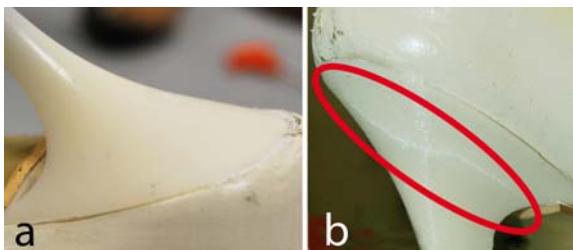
Assembly issues on TH heels: a) injection molded part with no damages; b) FDM part with a fracture at the base of the stem.
